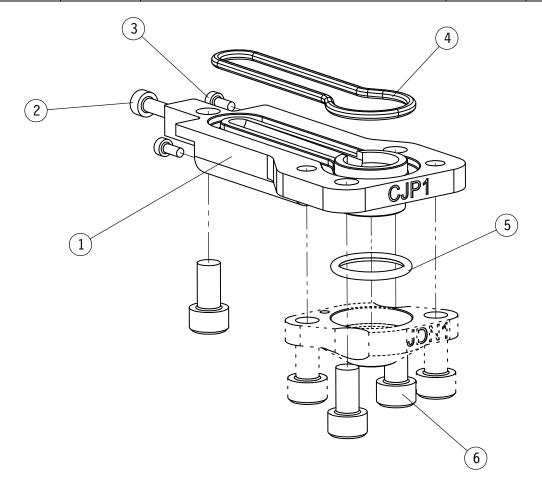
Nozzle plate SEPA Jetting FS300 parts
